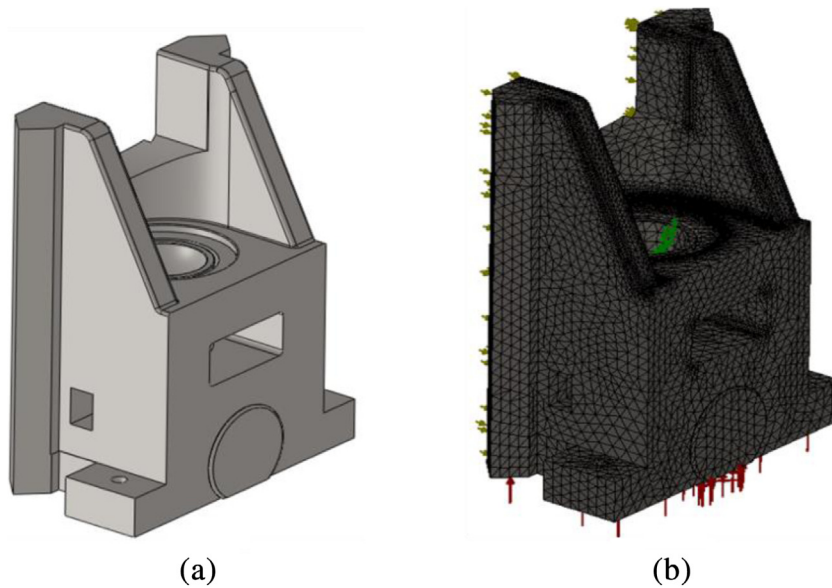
Ram assembly: (a) 3D CAD model, (b) Meshed model with loads and fixtures.
